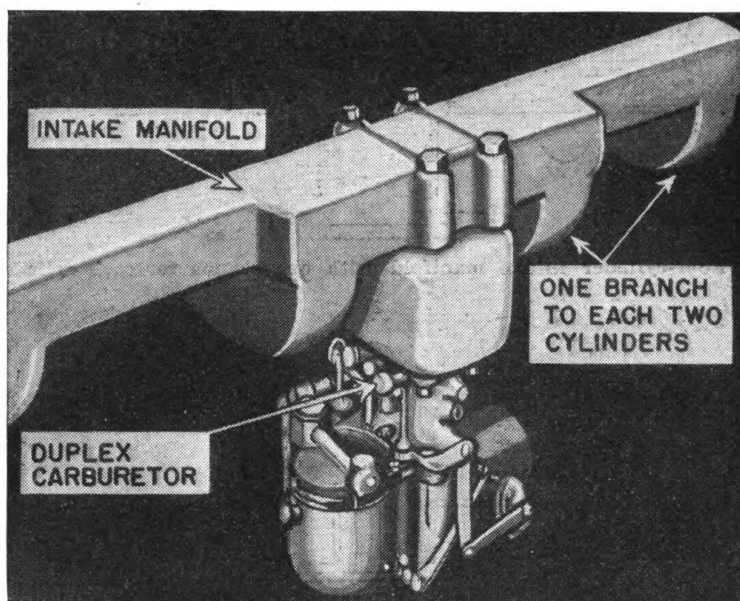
Intake manifold and duplex carburetor for an eight-cylinder "in line" engine.
